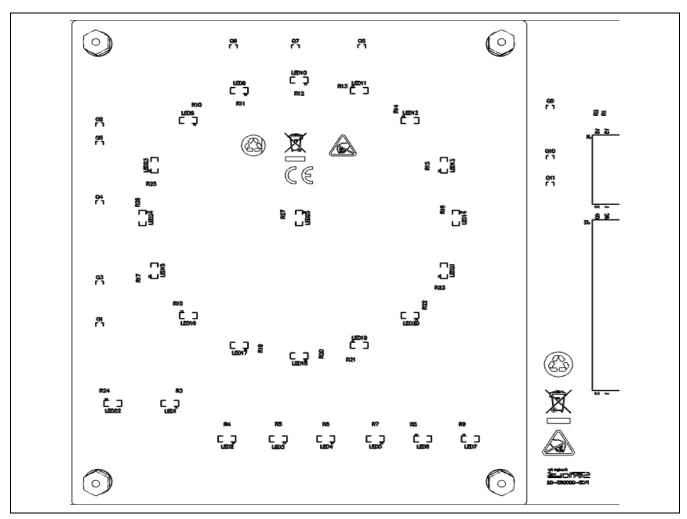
AE-CAP1-BWS Touch Application Board Overall Component Placement, Bottom
